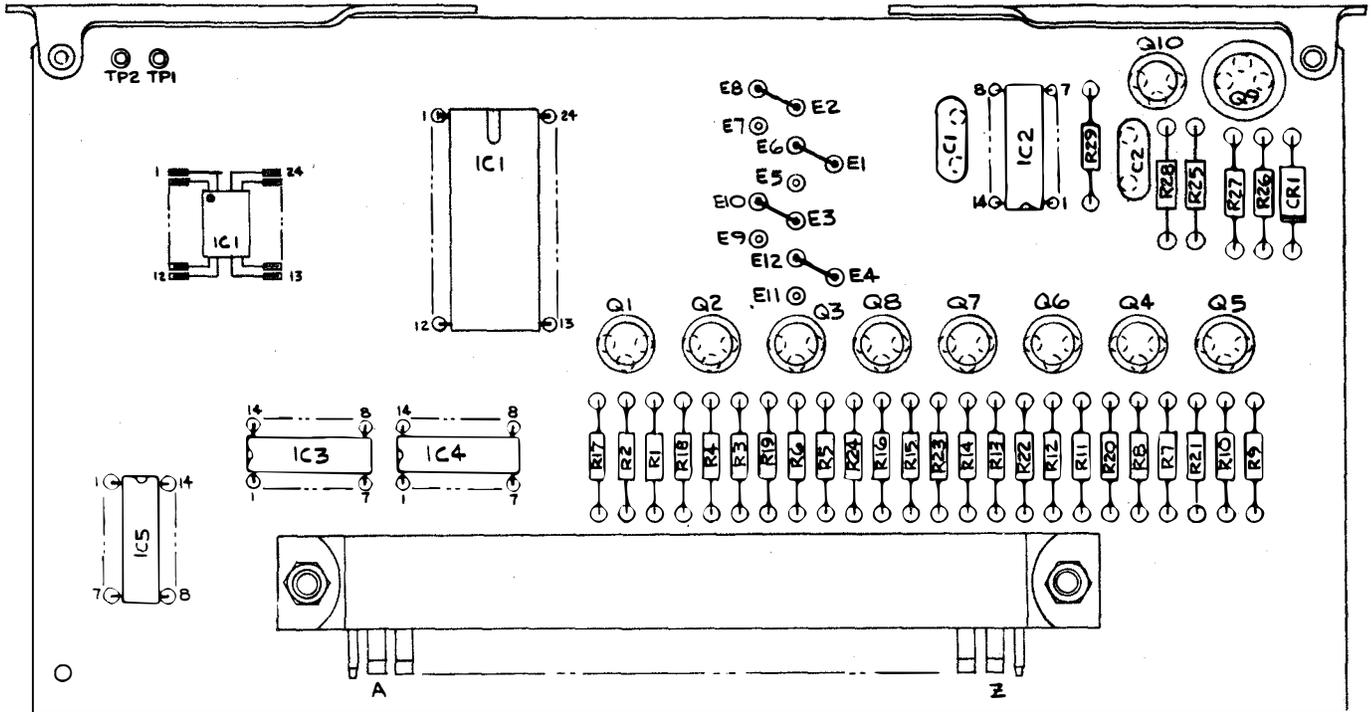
Fox Message Board 1A1A12 Component Location (36021120)
